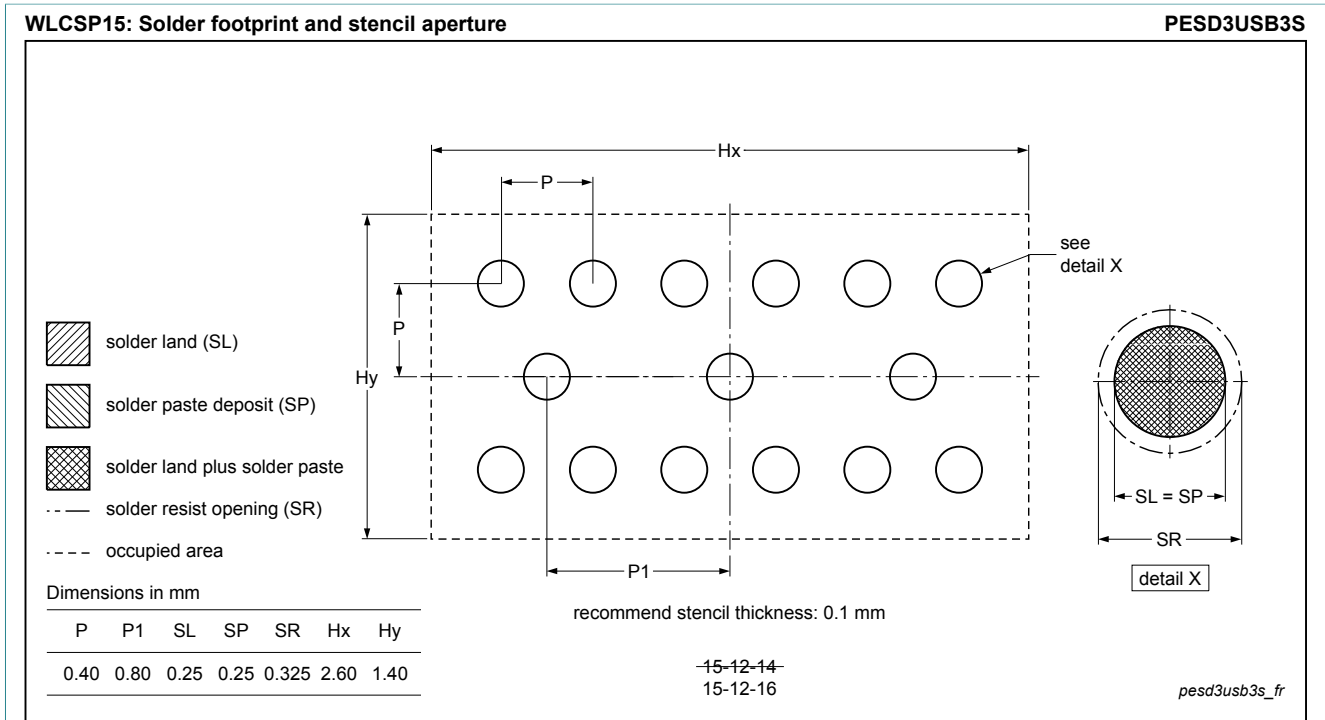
Soldering footprint WLCSP15 (PESD3USB3S)
